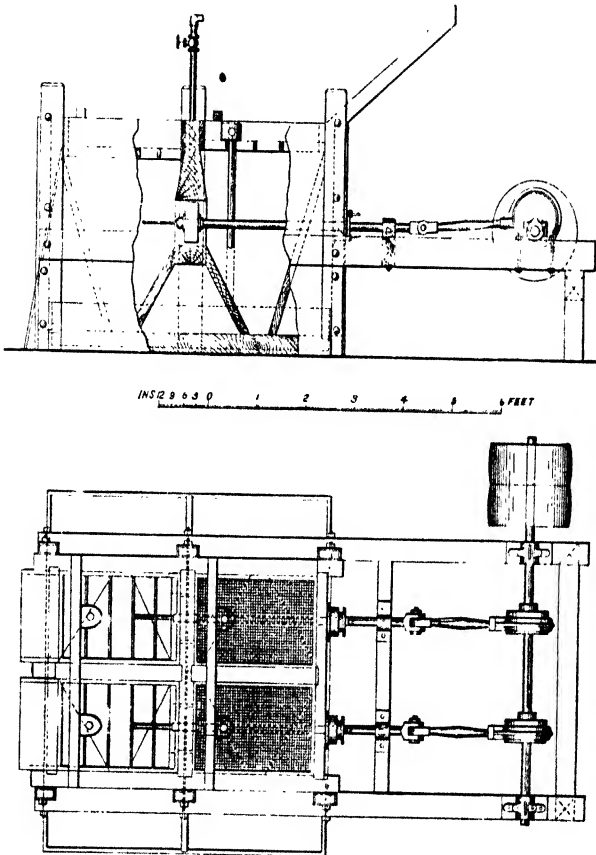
Jigs with horizontal piston. Sectional elevation and plan.
